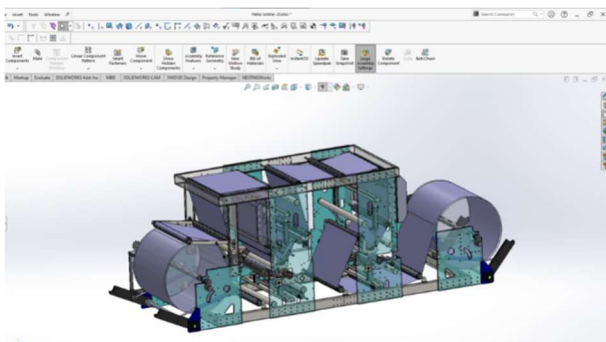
Industrial design of a roll-to-roll printing machine [13]
